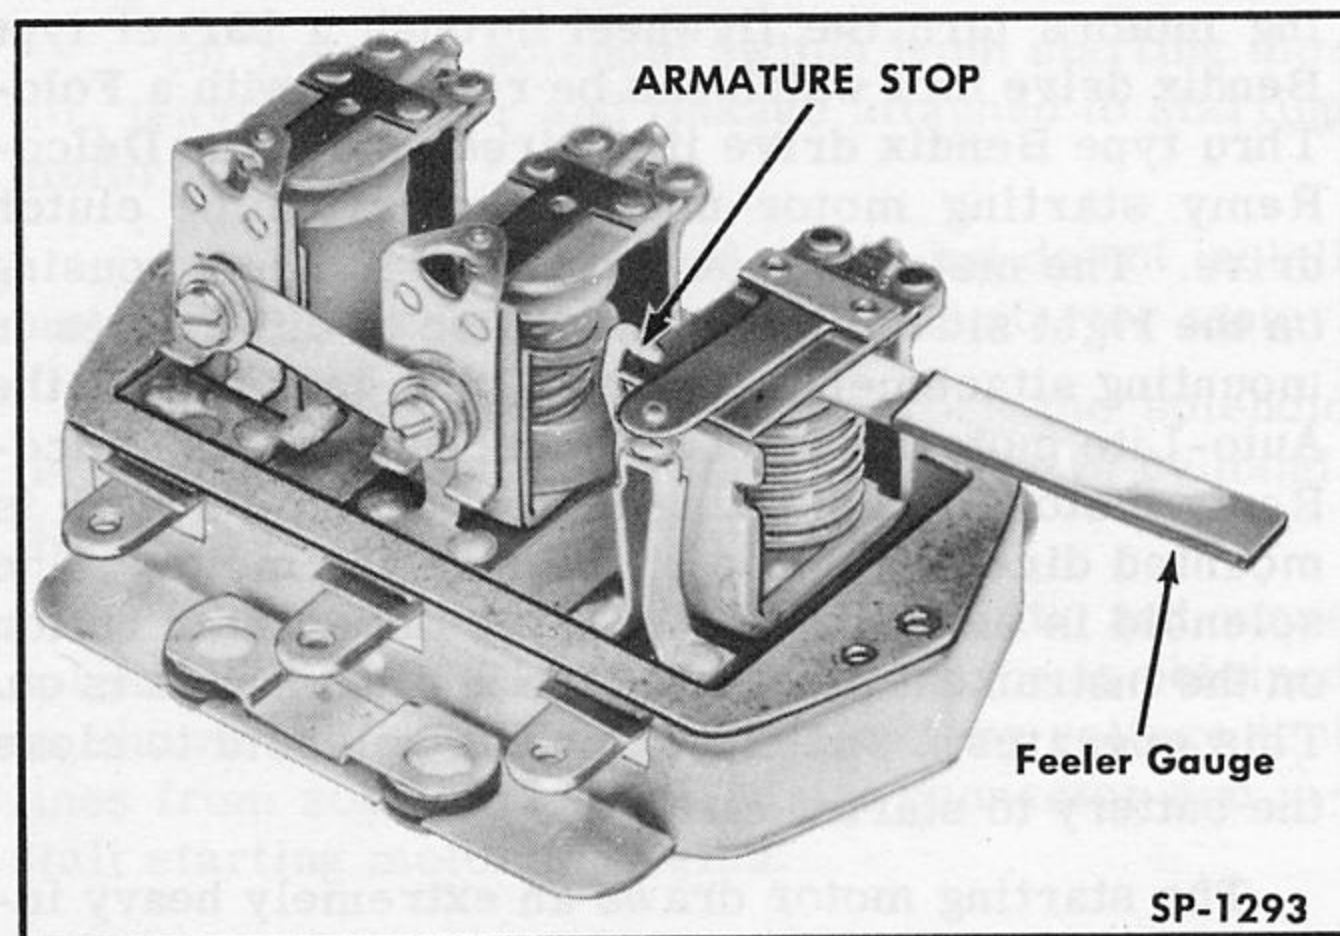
Checking Auto-Lite Cut-Out Relay Air Gap
